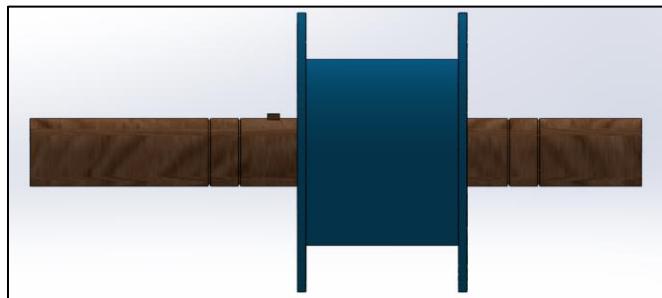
Tolerancing for the Shaft with The Inner Diameter of The Pulley Drum
